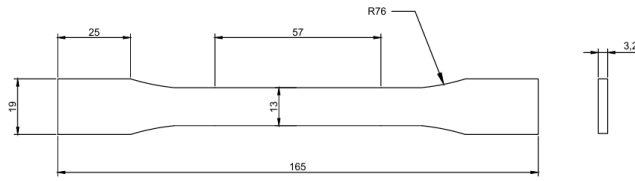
ASTM D638 specimen geometry adopted for static and fatigue tests. (all dimensions are in mm)
